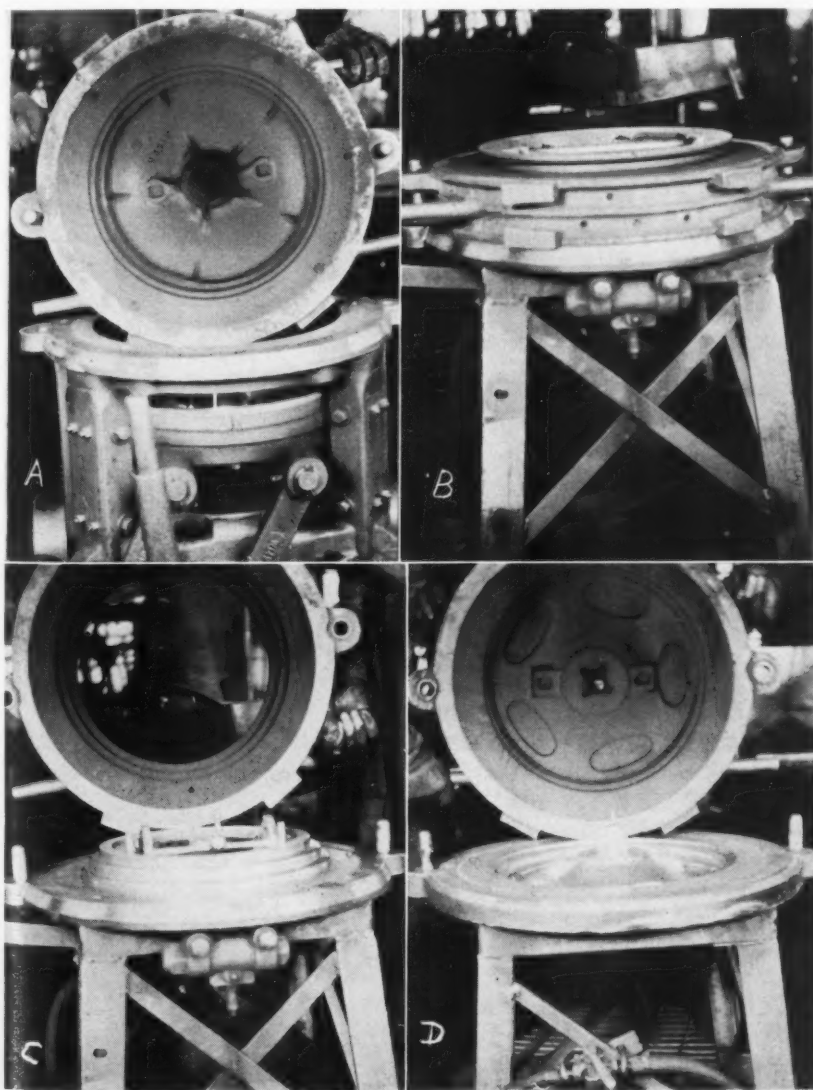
(A) Drag of three part mold. The finish casting is a front wheel made of high strength iron. (B) Showing cheek which had been slinger rammed with center section of pattern raised ready for lifting out. (C) Cheek ready for setting. Flask has no bars other than sand strip. (D) Cope ready to be assembled.
